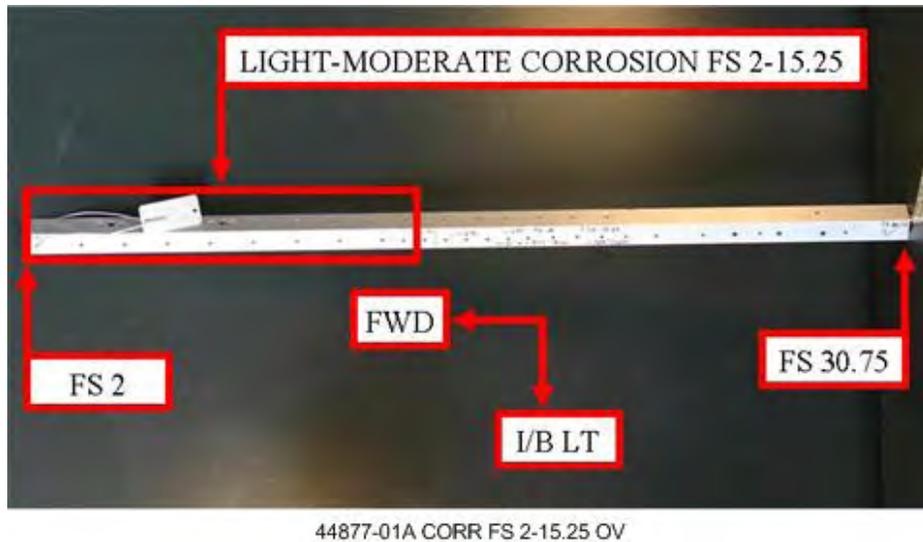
Location of Light-Moderate Corrosion on the Right Fuselage Upper Angle Longitudinal Beam Assembly FS 2 Through FS 15.25
